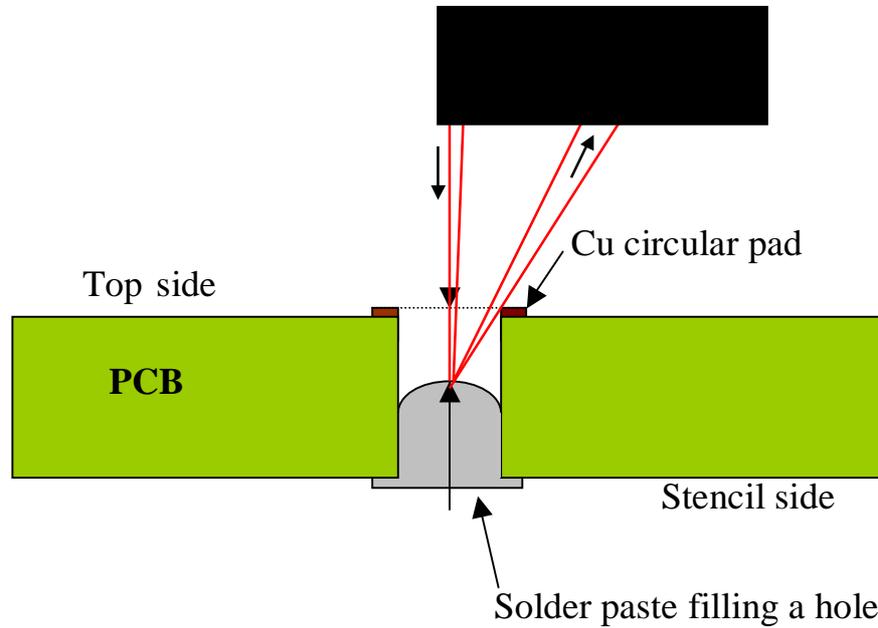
Schematic of height measurement of solder paste filling a PCB hole
